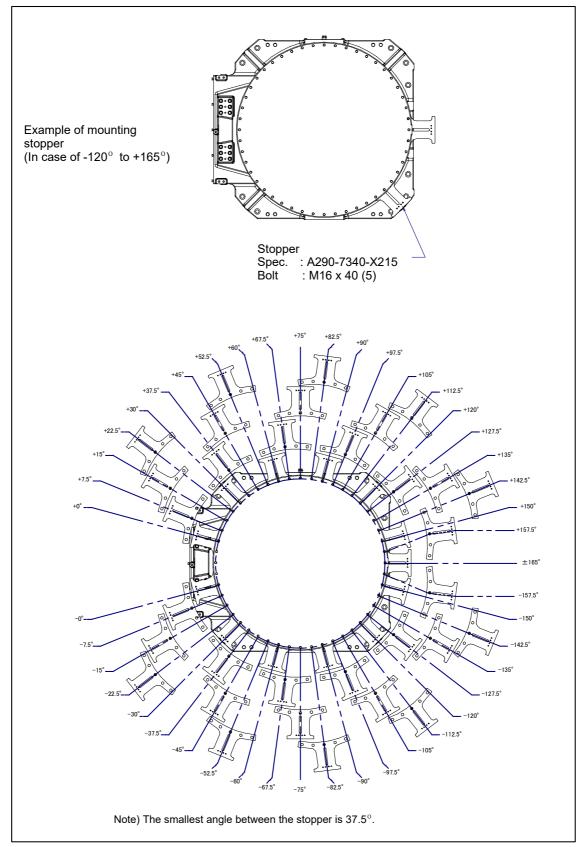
(a) Mounting of J1-Axis adjustable mechanical stopper (Option)
